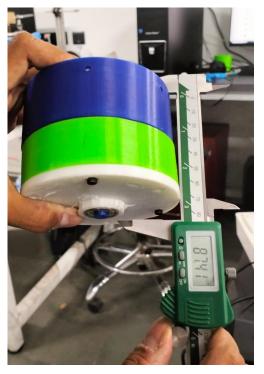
ISOMETRIC VIEW OF 3D PRINTED ACTUATOR
